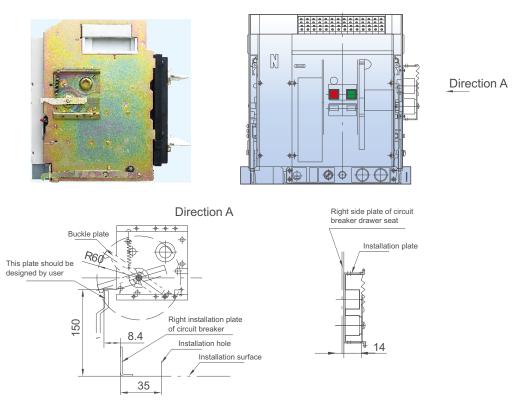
NA8G-1600 withdrawable type circuit breaker status door interlock installation dimensions
